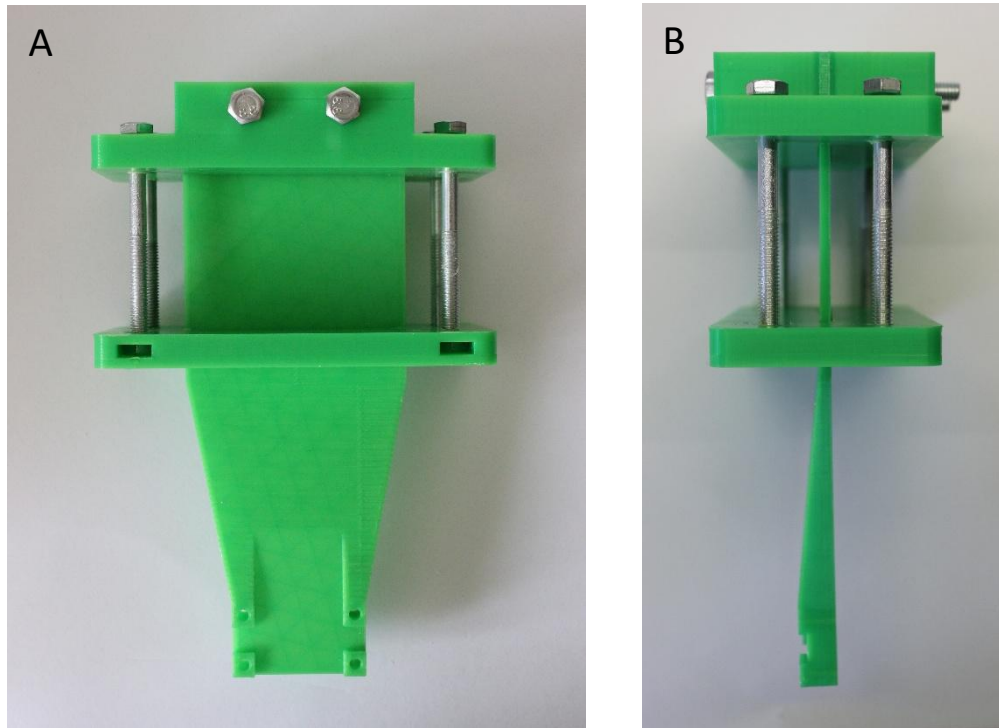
Mount assembly viewed from the front (A) and from the side (B)
